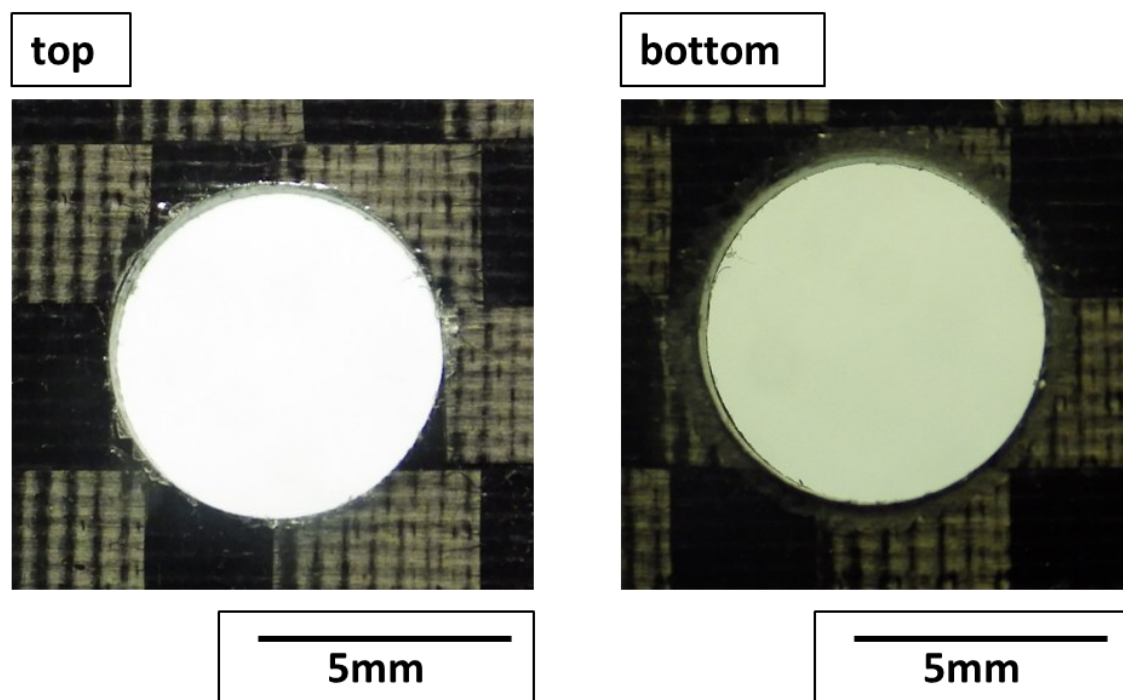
Machined hole surface[200W,1.00mm/s]
